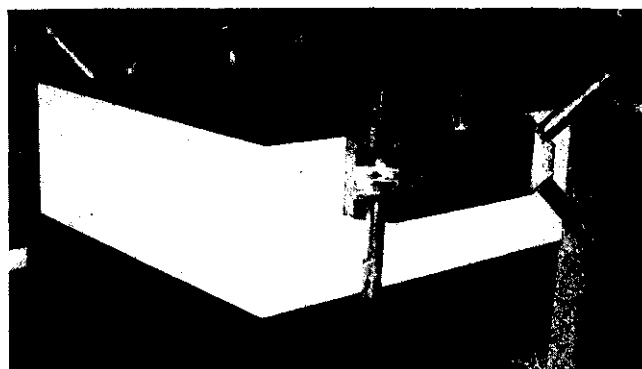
22.5° 'X' dipole magnet steel assembly.
